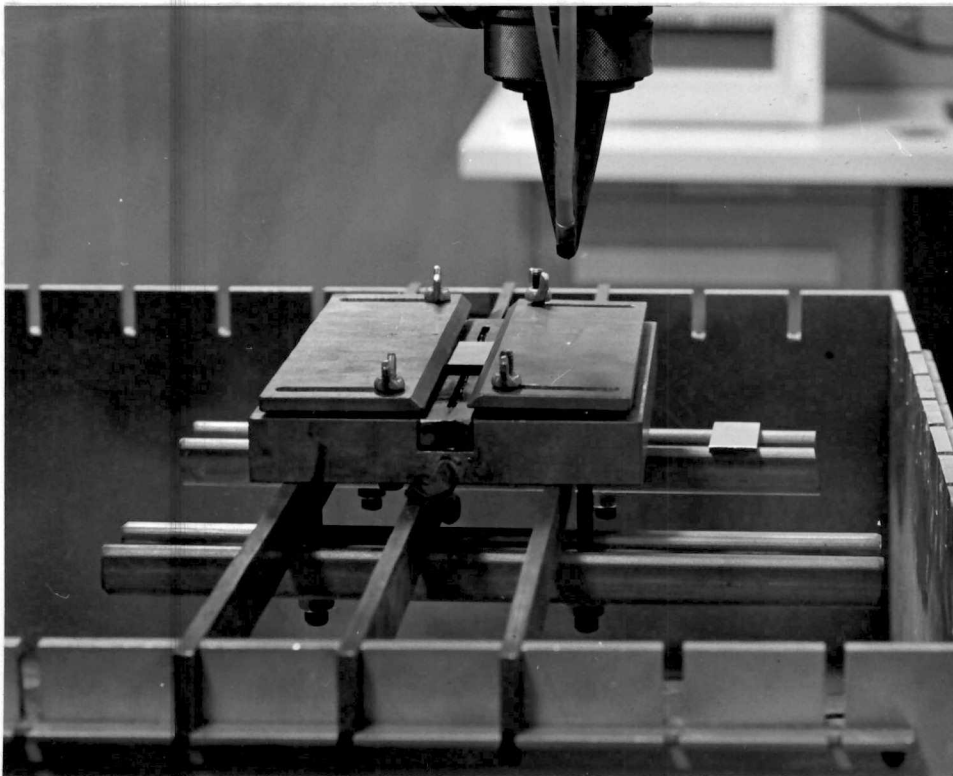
Welding fixture used to secure samples during welding.
